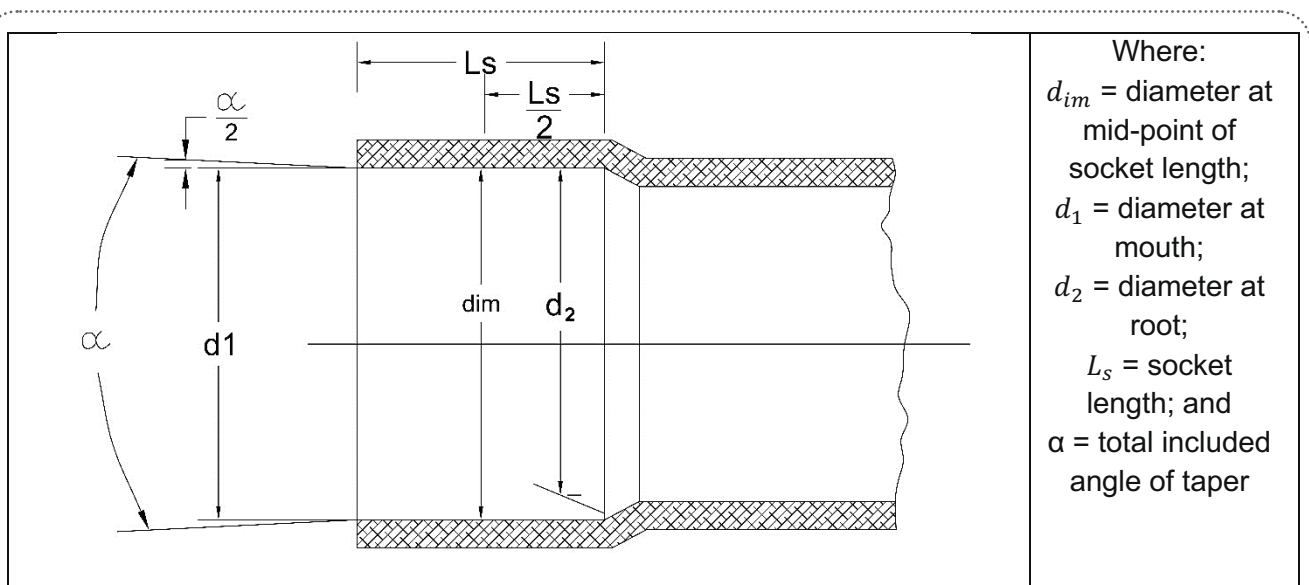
Socket Dimensions for Solvent Cement Joints
